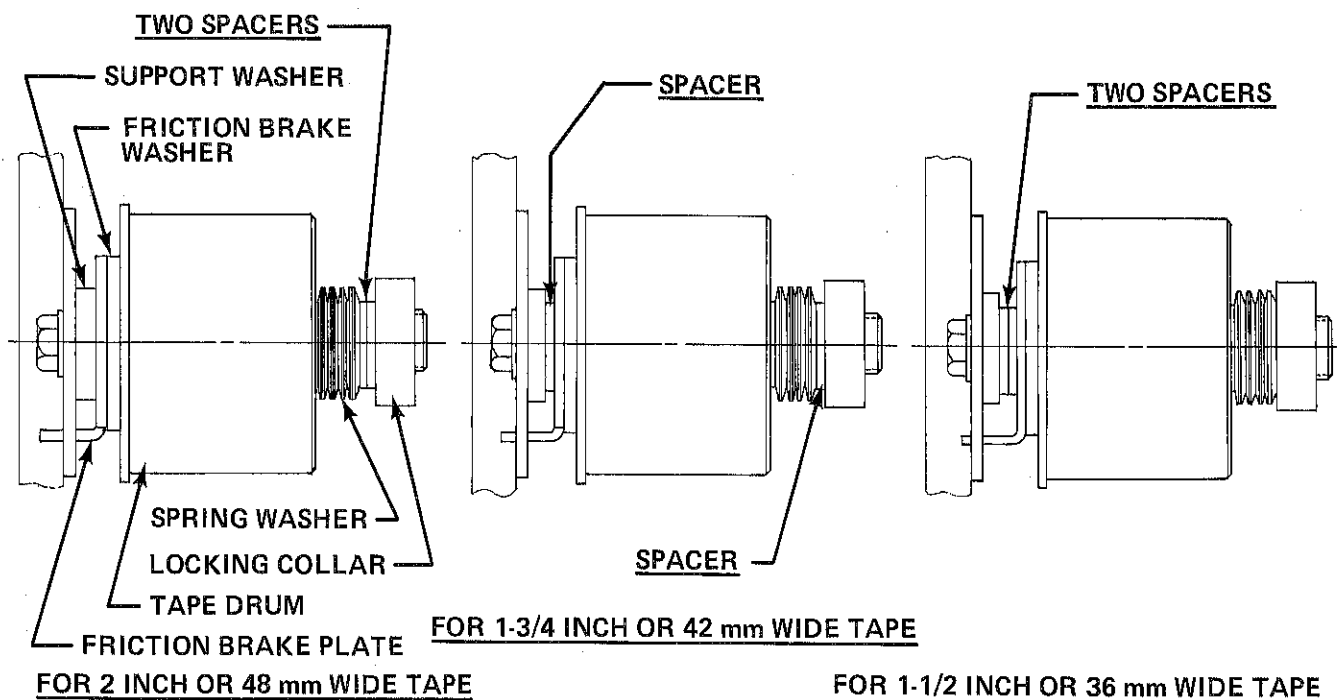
TAPE WIDTH ALIGNMENT - TOP VIEW - UPPER HEAD
